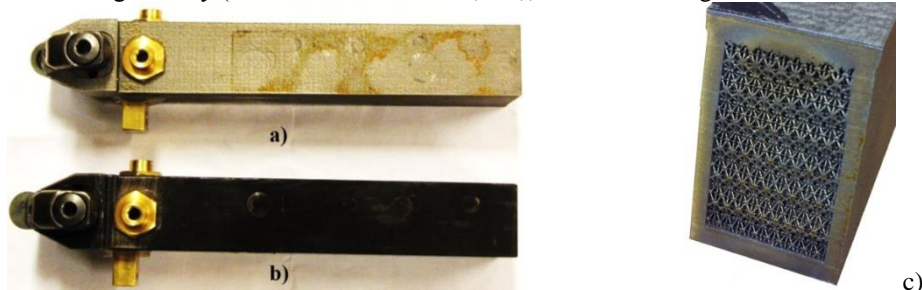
General view of tested toolholders: a) designed by the selective laser sintering; b) standard tool; c) designed internal structure of experimental tool.
